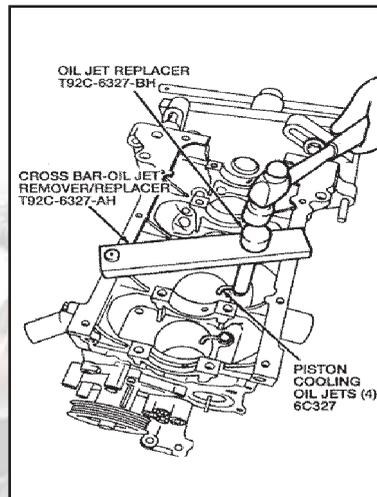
For easy oil jet removal/installation use these tools on Ford 2.0L engines
